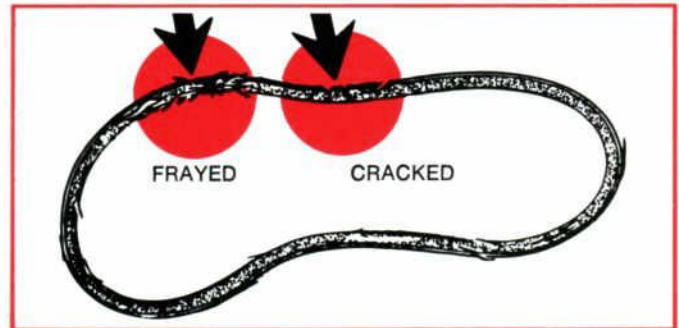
When Inspecting any Drive Belt, Look for These Two Damage Conditions and Replace if Found.
